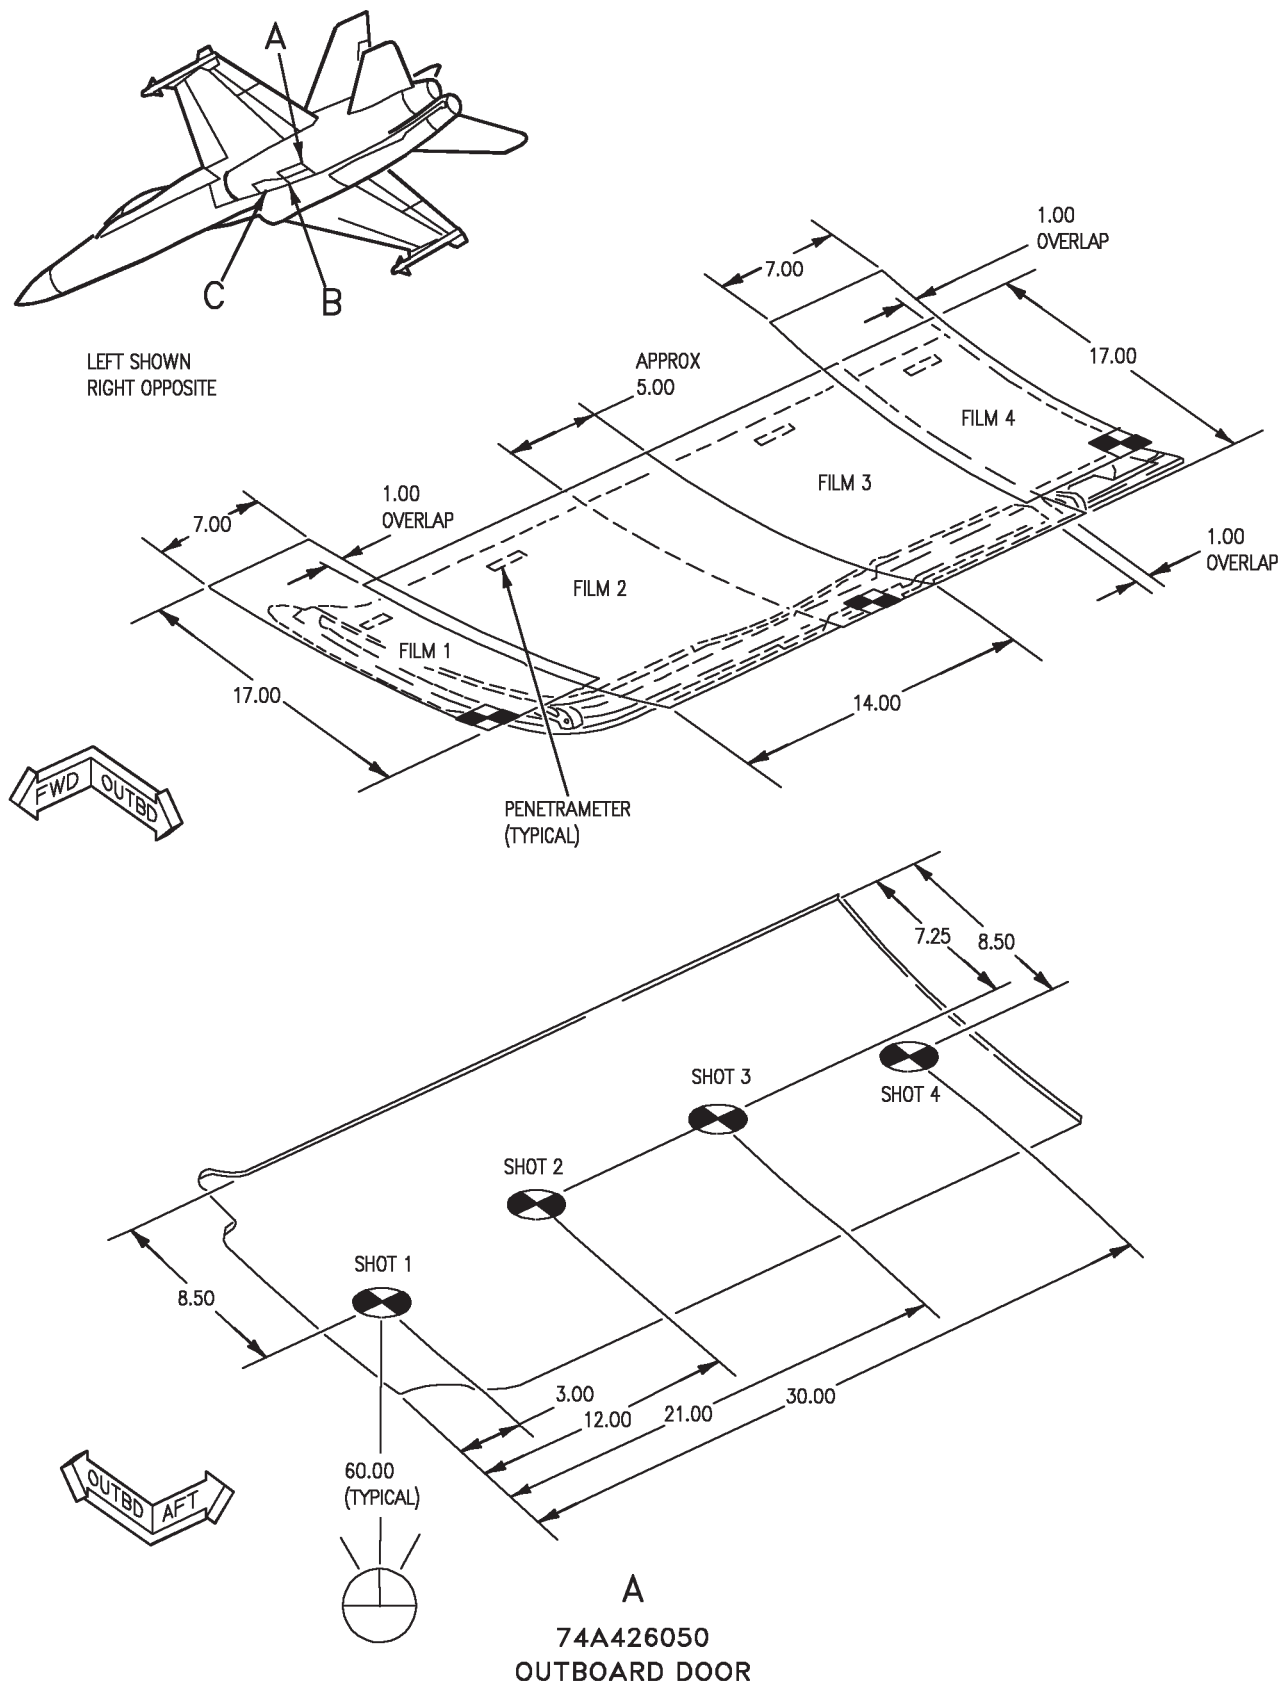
Main Landing Gear Doors, Water in Honeycomb (Sheet 1)
